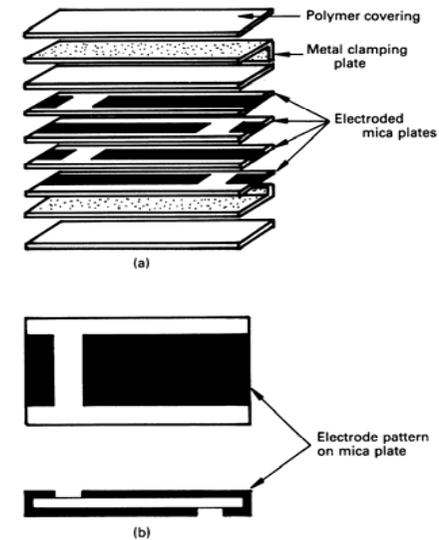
Silver mica capacitor: (a) exploded construction view and (b) electrode pattern of a silvered mica plate.
